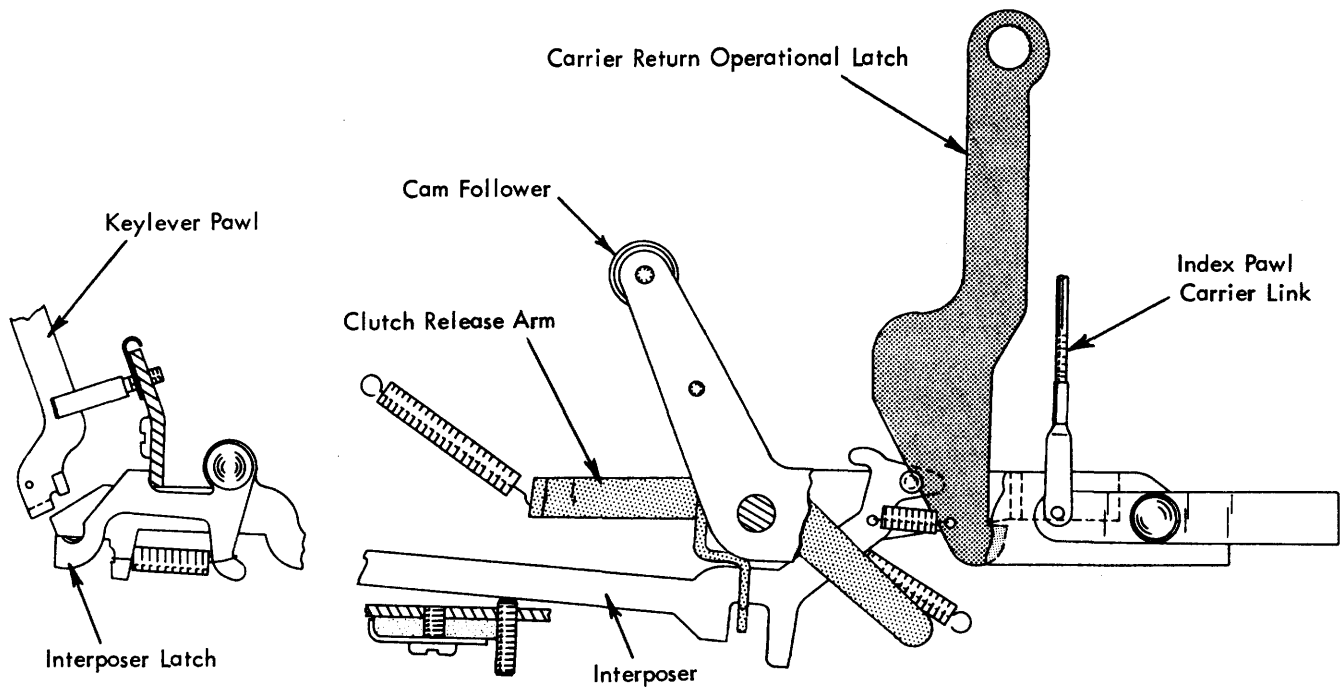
Carrier Return/Indexing Operational Control Mechanism
